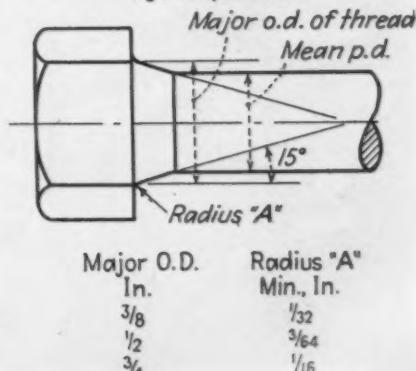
By close control of dimension A and slope of B, it is possible by relieving edge of flat dies to so roll thread that crest blends exactly into shank of cap-screw, making it difficult to distinguish between rolled thread and cut thread if machine is adjusted properly.
